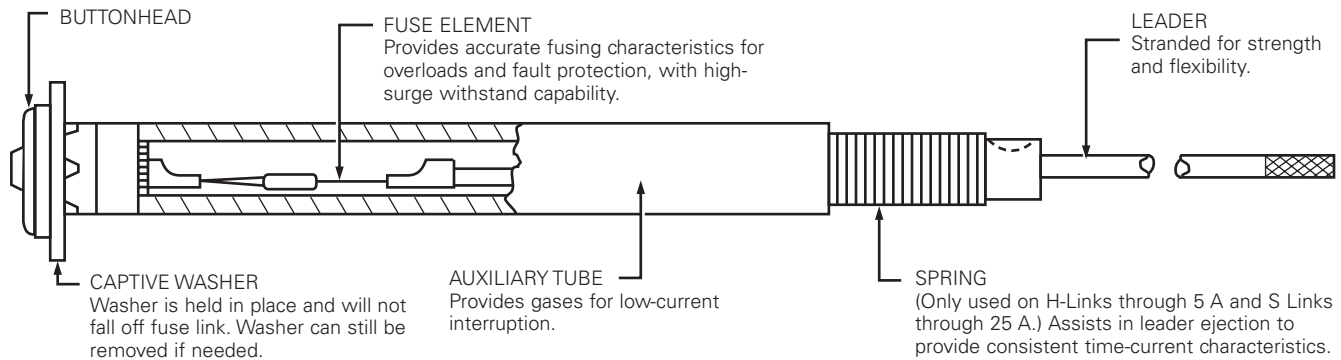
Typical type D, S, and H (1 A through 5 A) fuse link construction.
